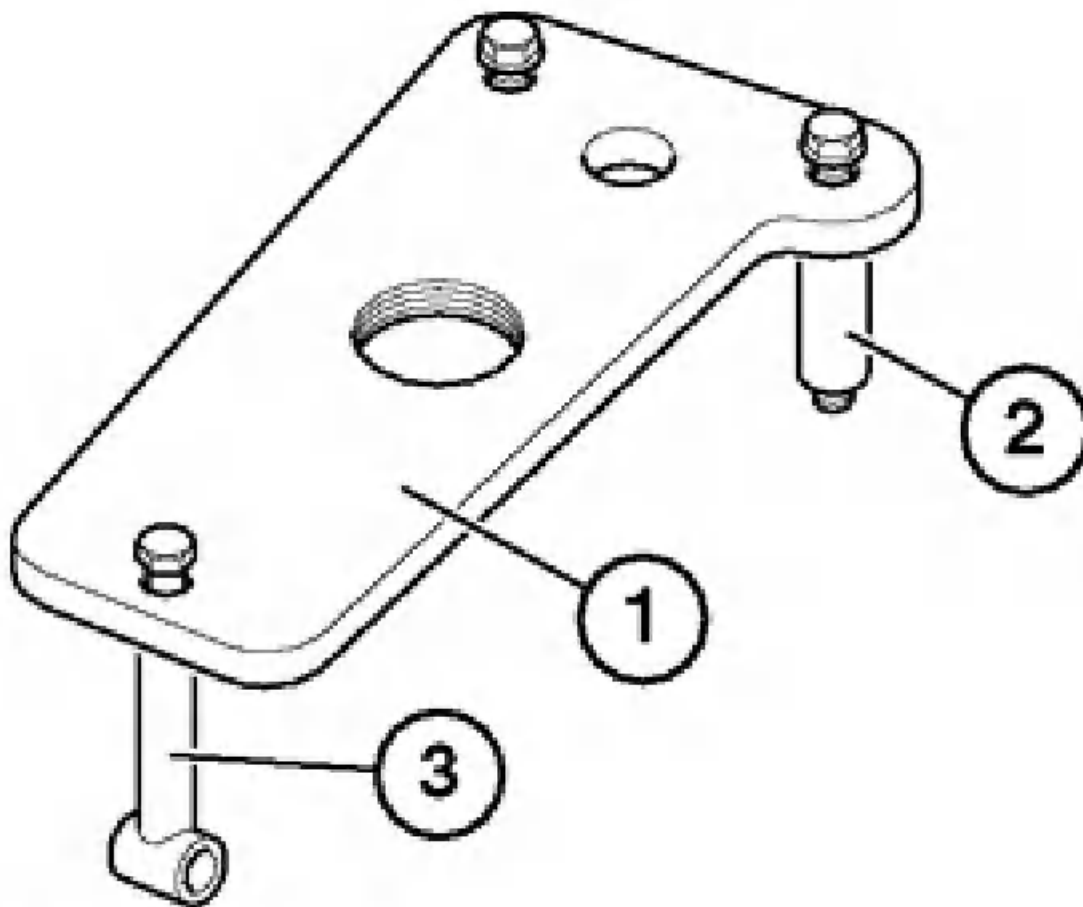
Identifying Special Tools 23 1 310 For Fitting Locking Device On Deflection Lever
